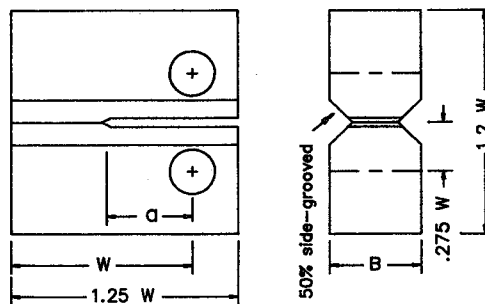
Side and front view of the 50% side-grooved compact-test specimen; $B = 0.5 W$, $a = 0.6 W$
